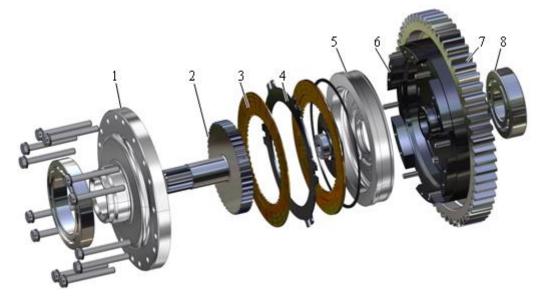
2<sup>nd</sup> Gear Assembly (BX50 series transmission)
